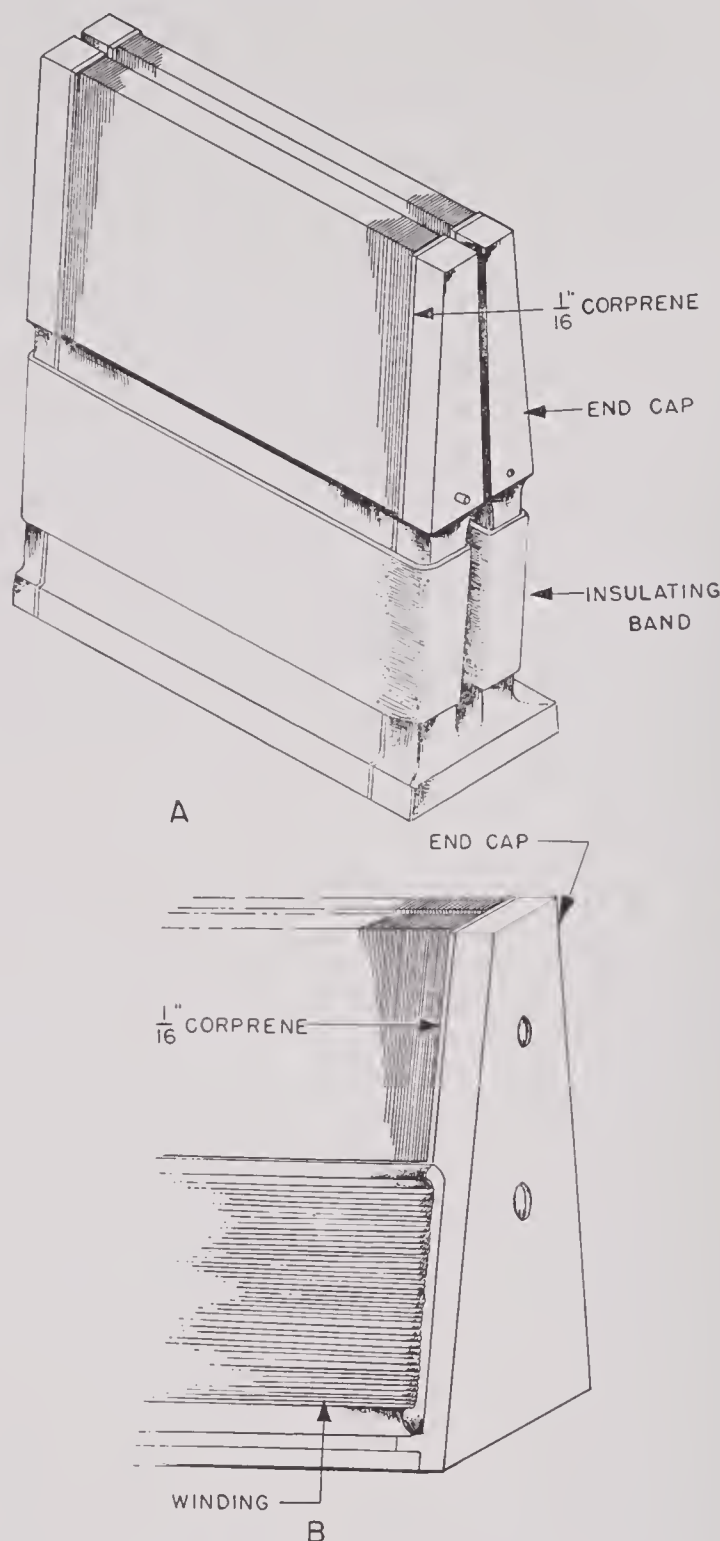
A. Aluminum end cap; end cap under winding. B. Bakelite end cap; end cap over winding.
